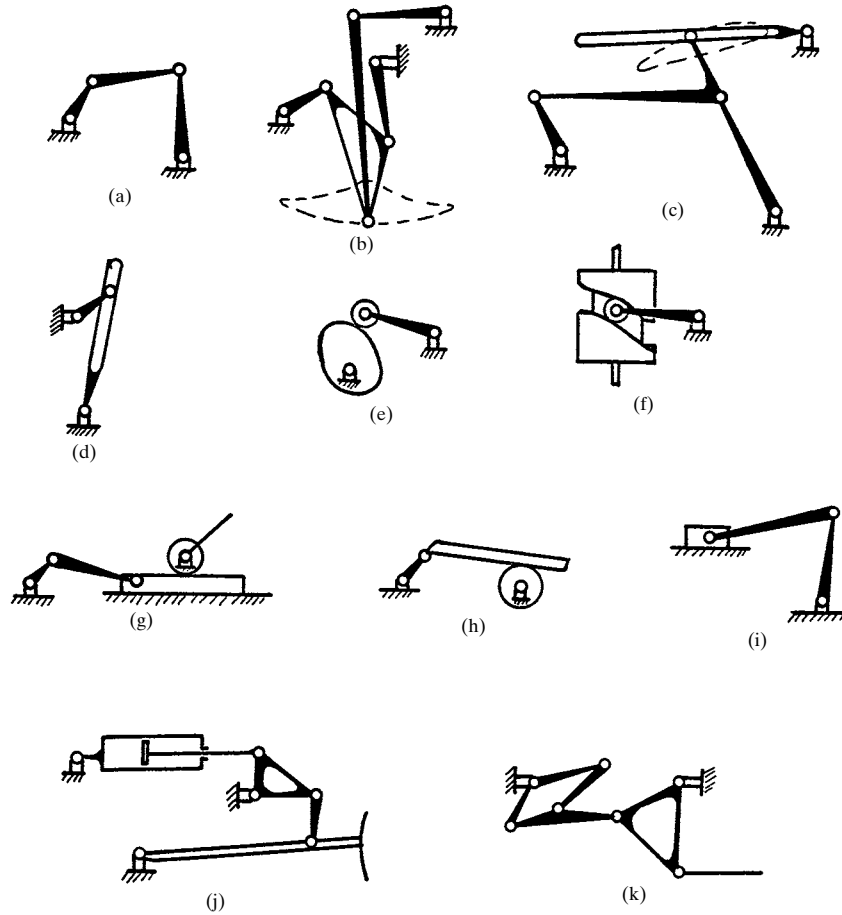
Oscillating mechanisms I. These mechanisms cause an output to repeatedly swing through a preset angle. (a) Four-bar linkage; (b) six-bar linkage; (c) six-bar linkage with pin in slot; (d) inverted slide-crank quick-return linkages; (e) radial cam and follower; (f) cylindrical cam; (g) geared slider crank; (h) geared inverted slider crank; (i) slider-driven crank; (j) bulldozer lift mechanism; (k) oscillator of the Corliss valve gear.
